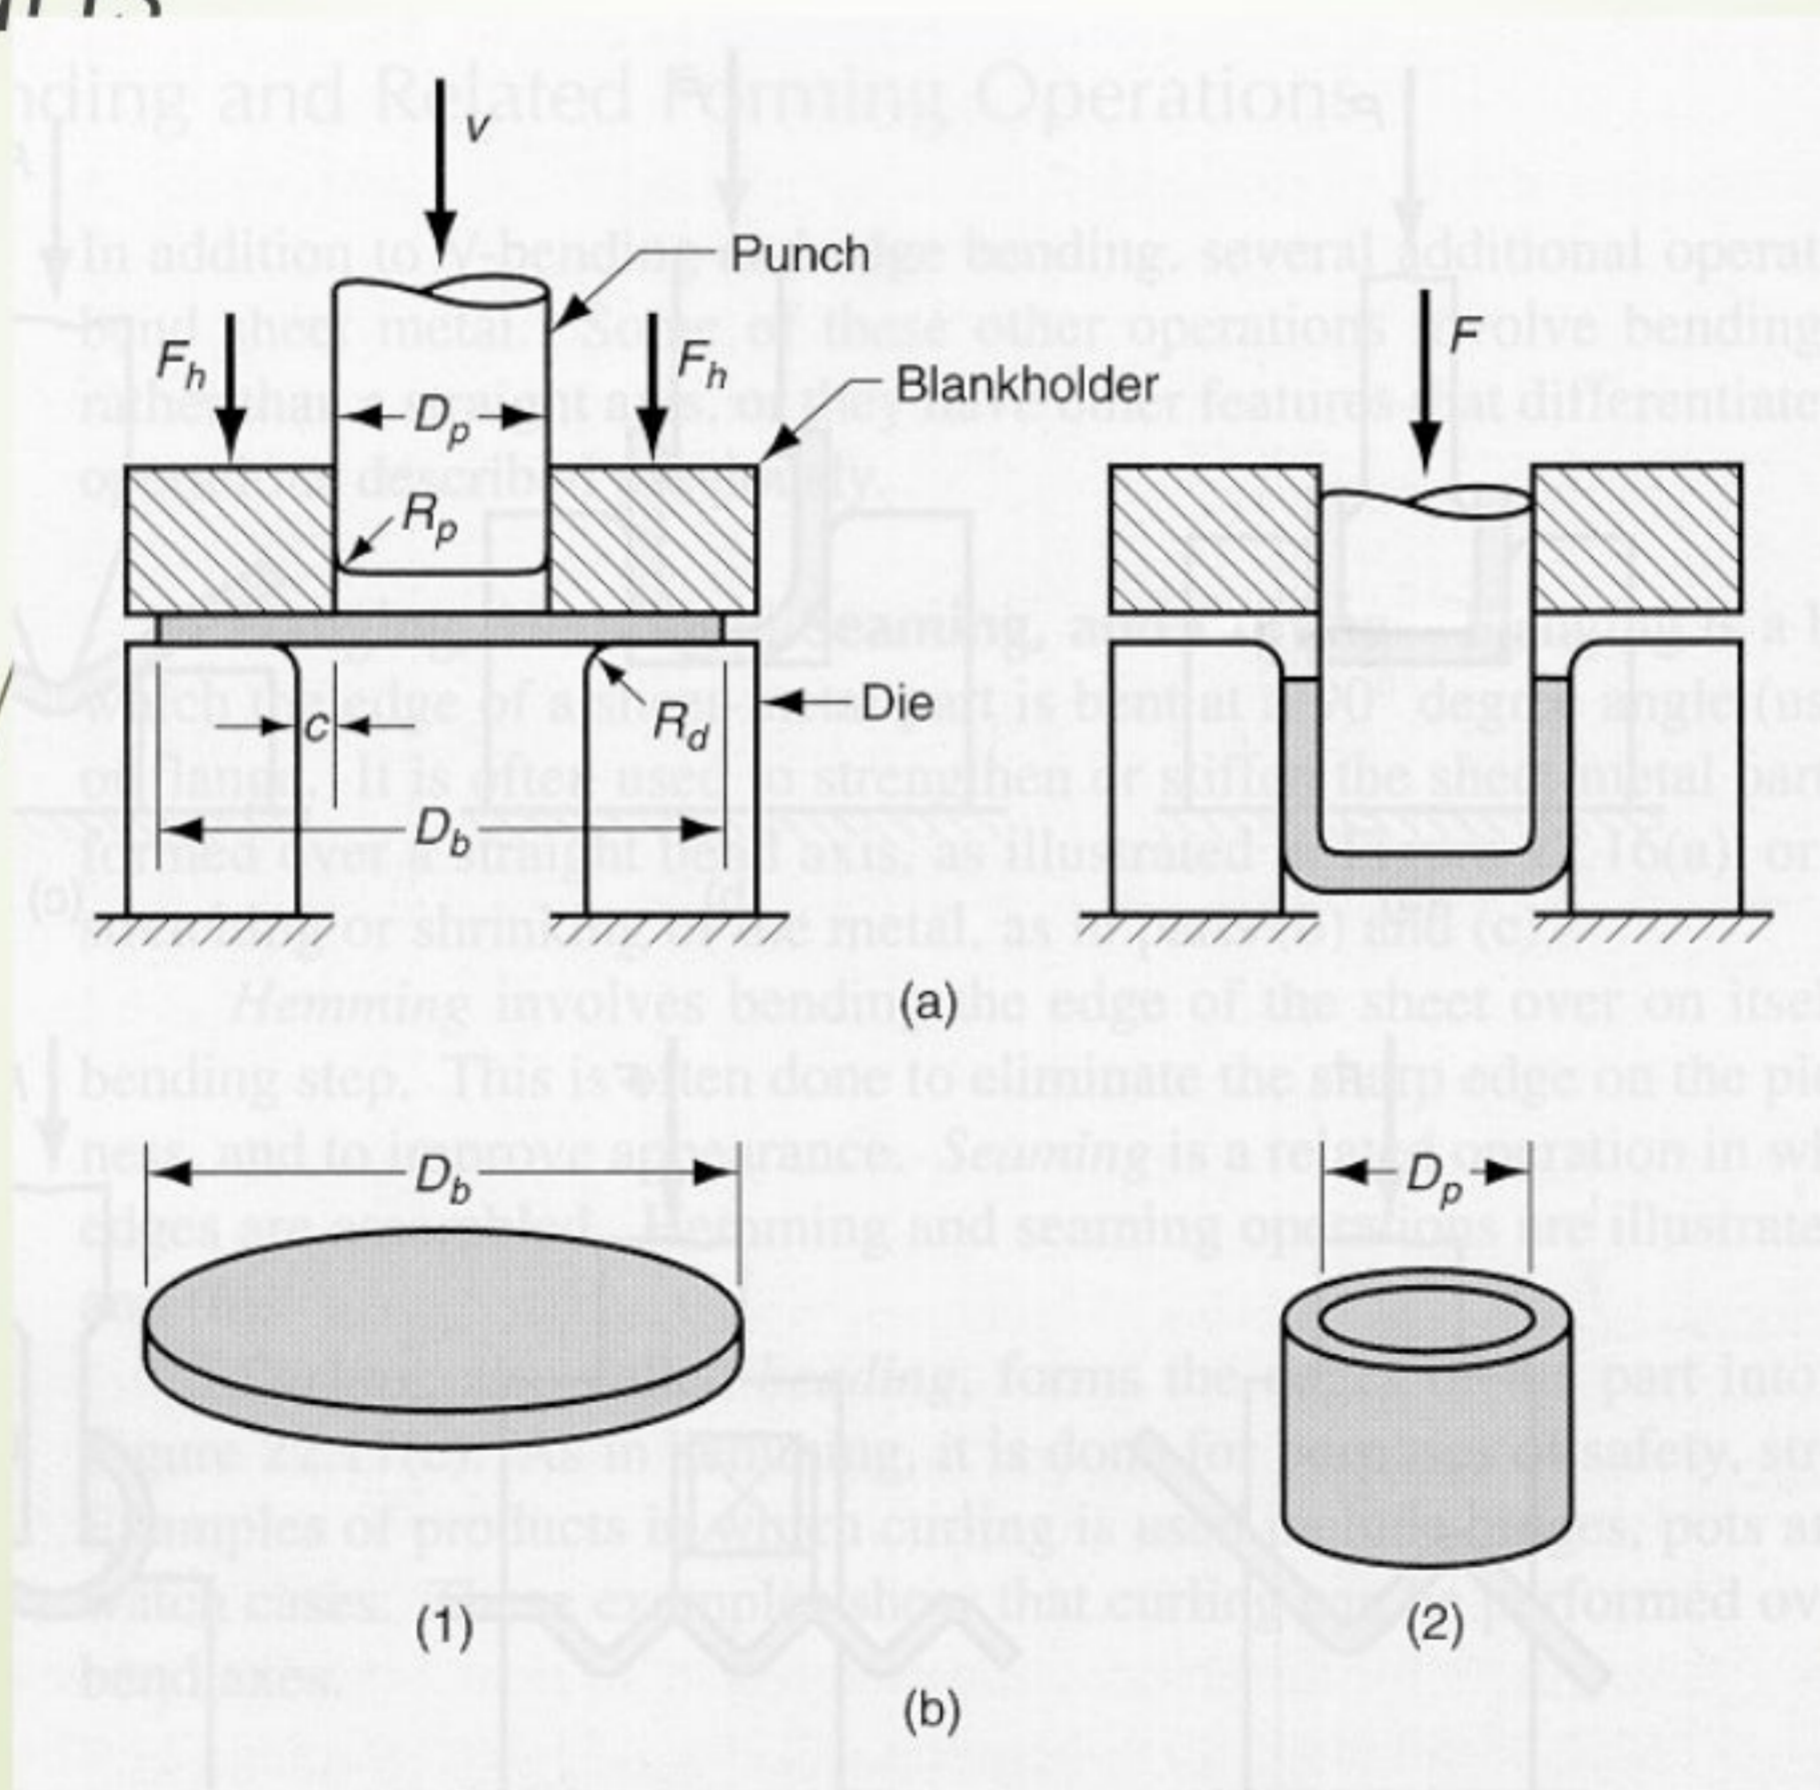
(a) Drawing of a cup-shaped part: (1) start of operation before punch contacts work and (2) near end of stroke; and (b) corresponding workpart: (1) starting blank and (2) drawn part. Symbols c = clearance, D_b = blank diameter, D_p = punch diameter, R_d = die corner radius, R_p = punch corner radius, F = drawing force, F_h = holding force.
